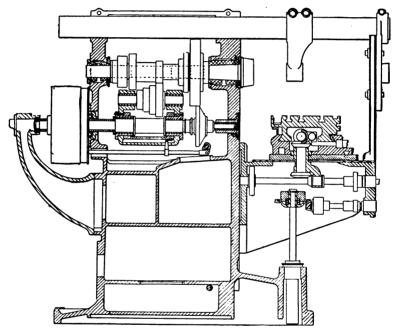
Vertical section through milling machine, spindle bearings and drive.
